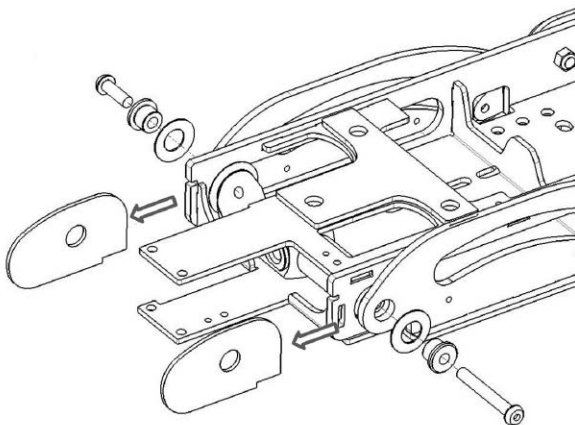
Remove the two screws holding the seat tilt shaft and associated parts.
